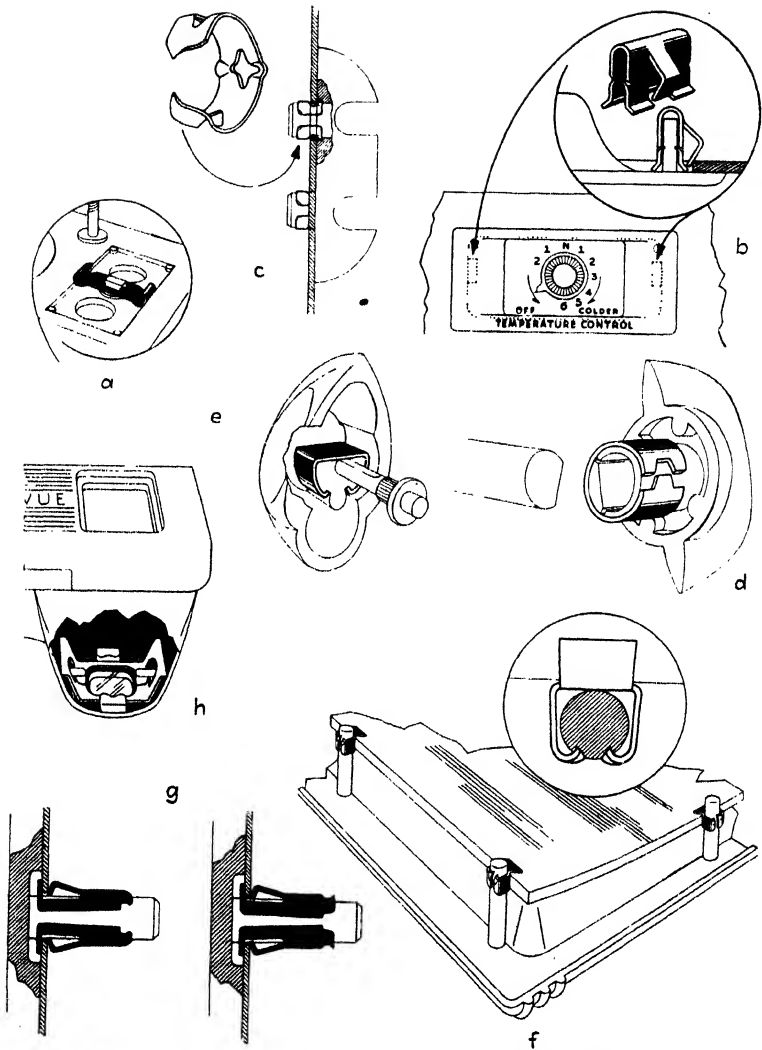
Types of (patented) Tinnerman speed nuts and speed clips used for fastening plastic moldings together or to mating parts: (a) Nut having prongs to grip a rectangular stud integral with a molded plate. Rounded spring ears hold the plate removably in an opening in a metal plate. (b) Clip having four sharp barbs to grip a projecting stud or rib on a molding and spring ears to hold the molding in a hole in a metal plate. (c) Clip fits around a circular stud molded integrally with shelf support and locks molding to holes in metal. (d) Molded knob with split hub has spring clip to hold hub to a D-shaped shaft. (e) Clip fastens plastic knob with molded projection to a D-shaped shaft. (f) Studs molded integral with a bezel receive pronged clips to hold a glass. (g) Tubular clips grip integral studs locking part either permanently or with a sliding fit. (h) Barbed clip grips a rib and holds a lens to molded part.
